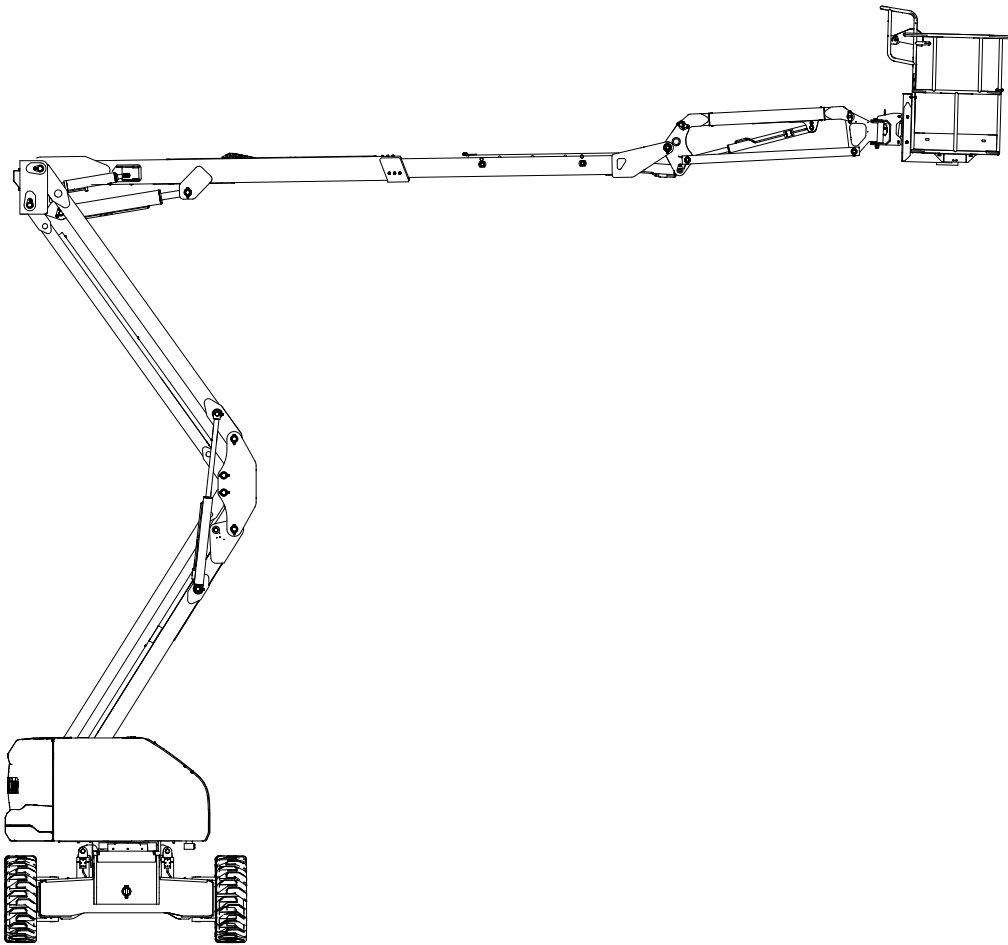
Check Slewing Bearing Connecting Bolts (a)
